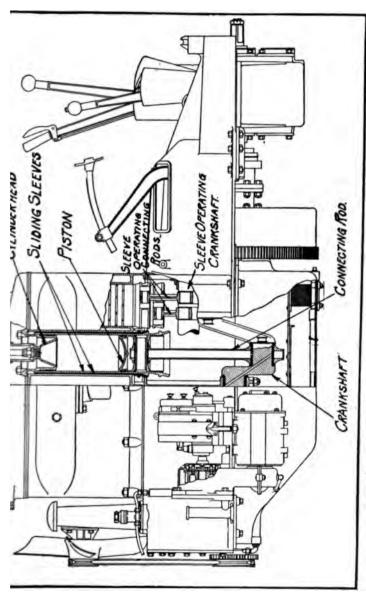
Bectional View of Knight System Sliding Sleeve Valve Motor.
